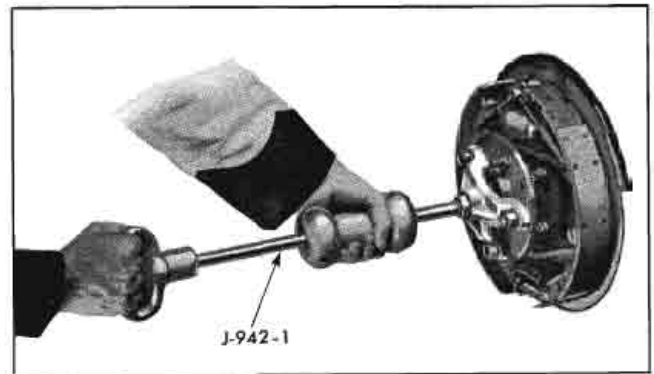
Removing Axle Shaft with Puller J-942-1
